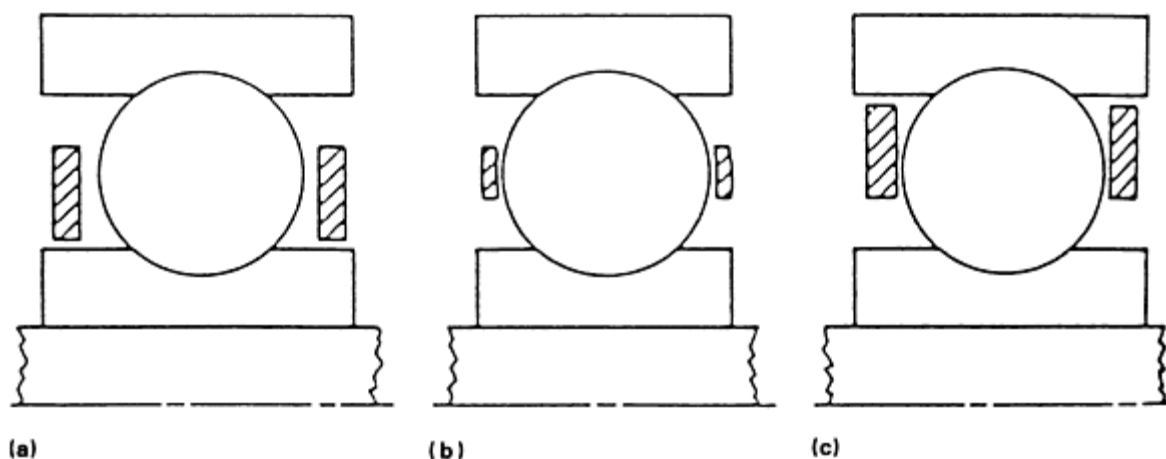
Schematic showing types of rolling bearing cages. (a) Inner ringland riding. (b) Ball riding. (c) Outer ringland riding
